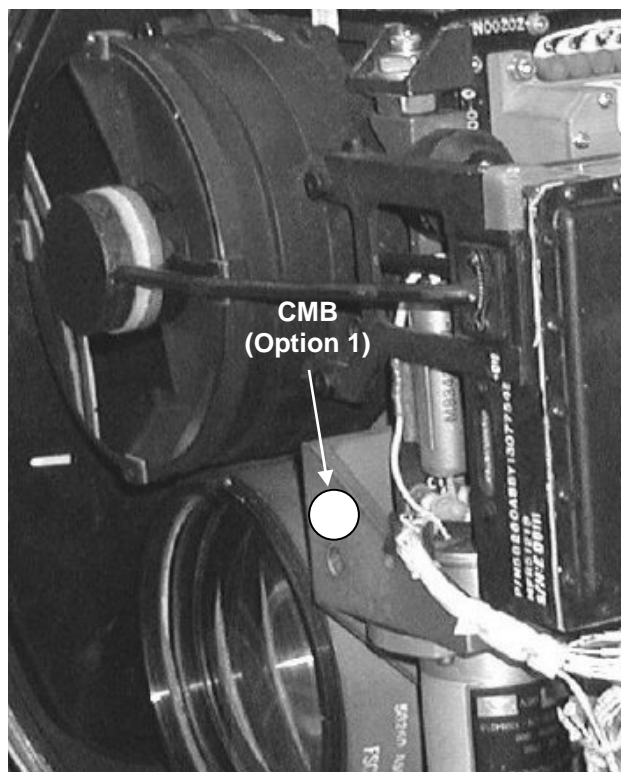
Day Sensor Sub-Assembly (AH-64A/D) CMB Location
